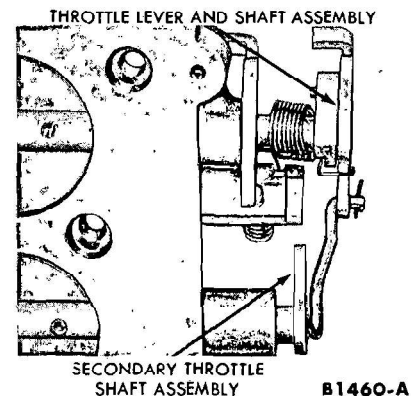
Throttle Lever and Shaft Assembly Installation—Holley 4-V
